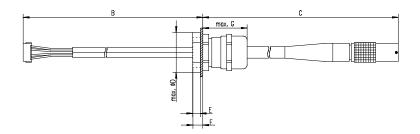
Interface Cable KA54, Prop. 2 (short thread)
